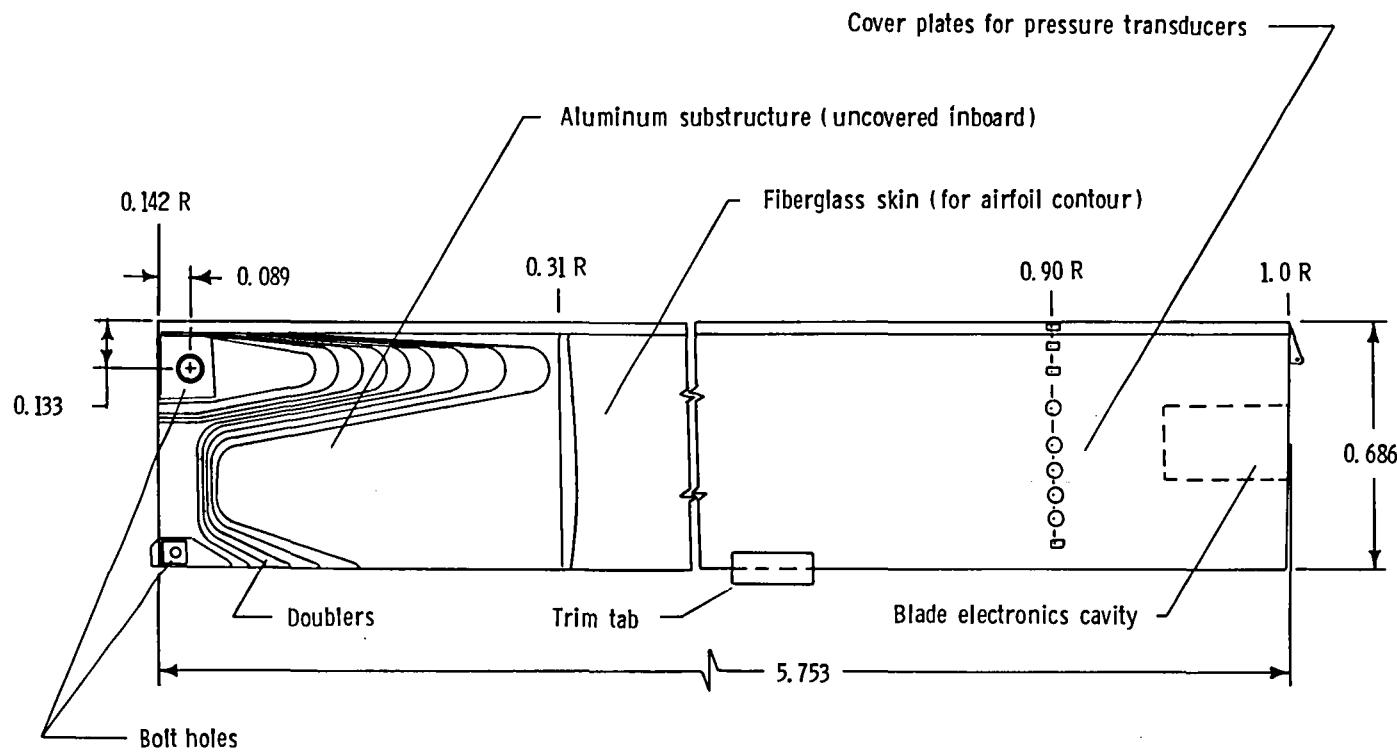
Planform of main-rotor blade. Dimensions given in meters.
